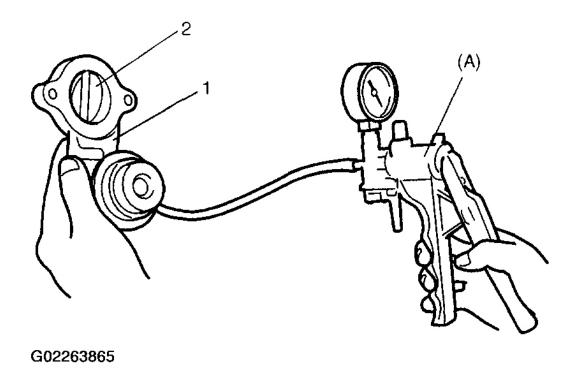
Connecting Special Tool To Intake Control Valve Courtesy of SUZUKI OF AMERICA CORP.
